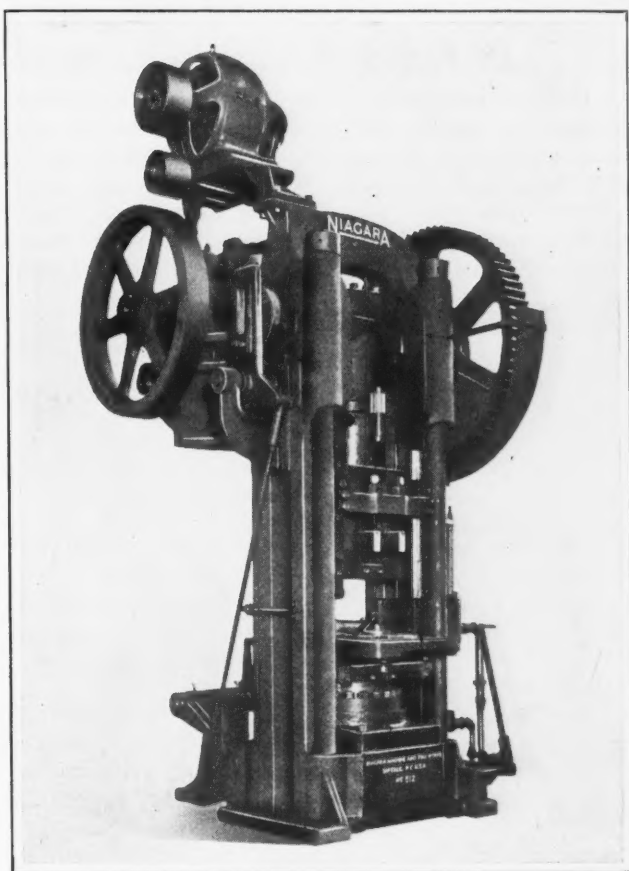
Niagara Straight-sided Single-crank Press equipped for Hot Forging
